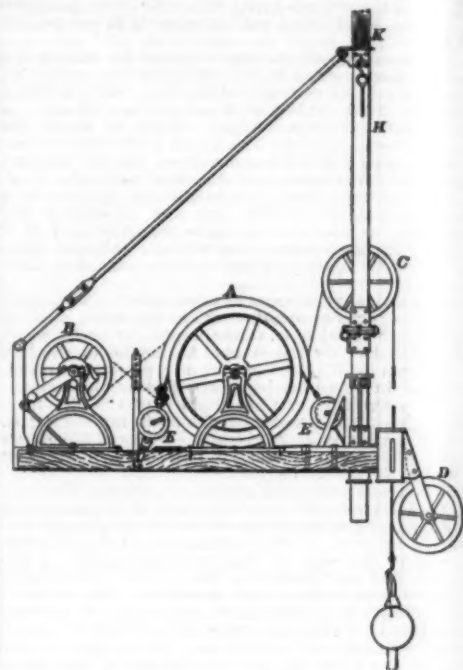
THE SIGSBEE STEAM SOUNDING MACHINE.
